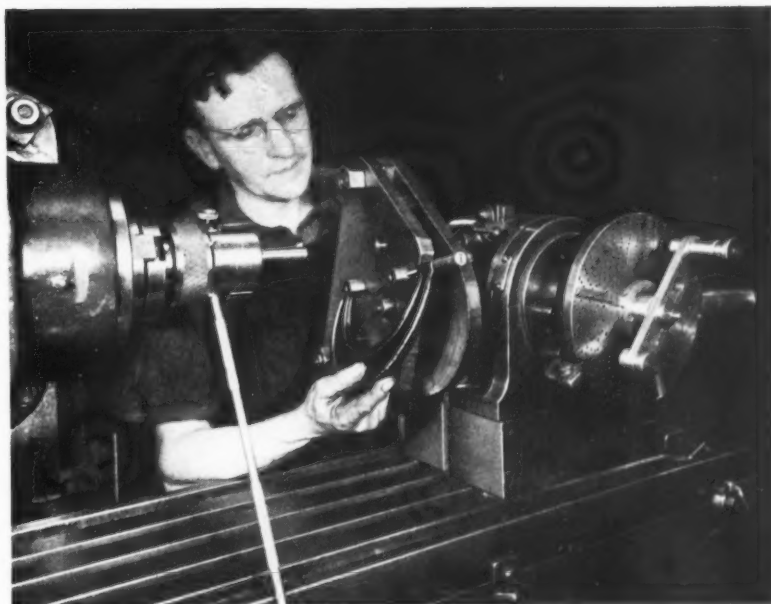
Milling Machine Set-up for Precision-boring of Bushing Holes
